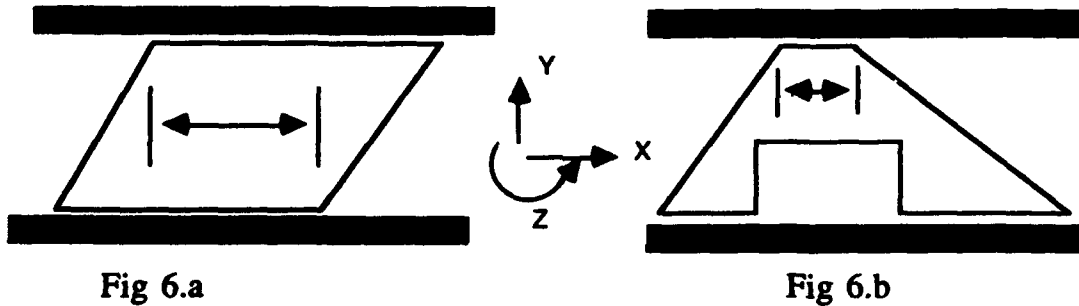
a and Fig 6.b are part top views to illustrate the required dimension of fixturing surface and vise contact to be in equilibrium.
